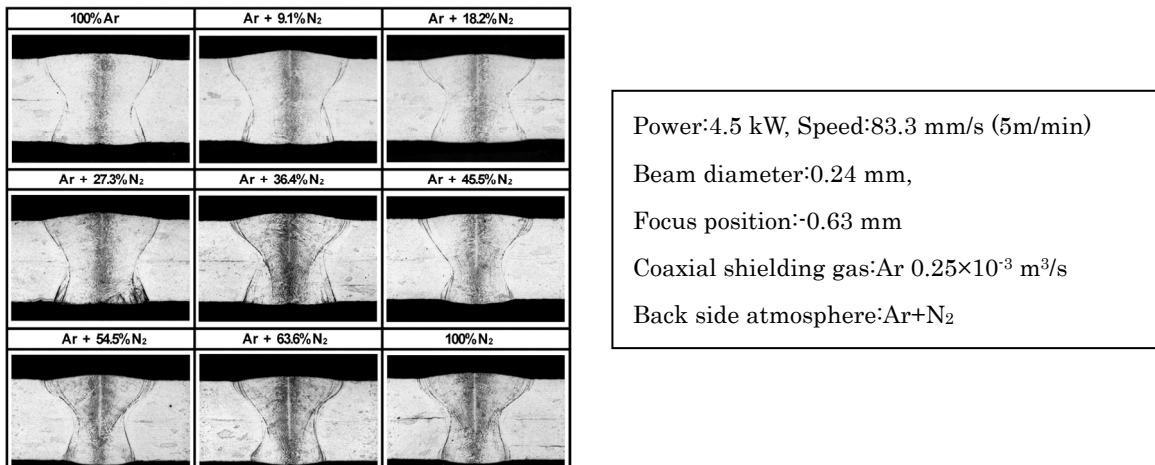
Cross-sectional macro-photographs of CO₂ melt-run welds made with various back side atmosphere.
